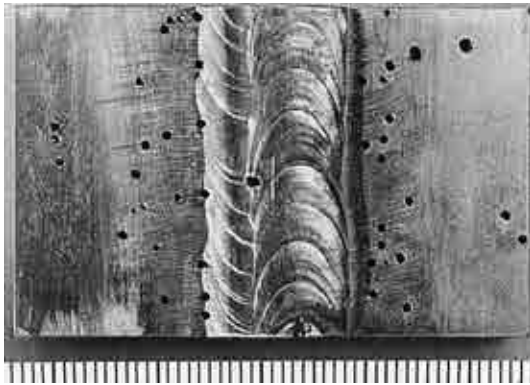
Pitting corrosion on a 304 weld joint
